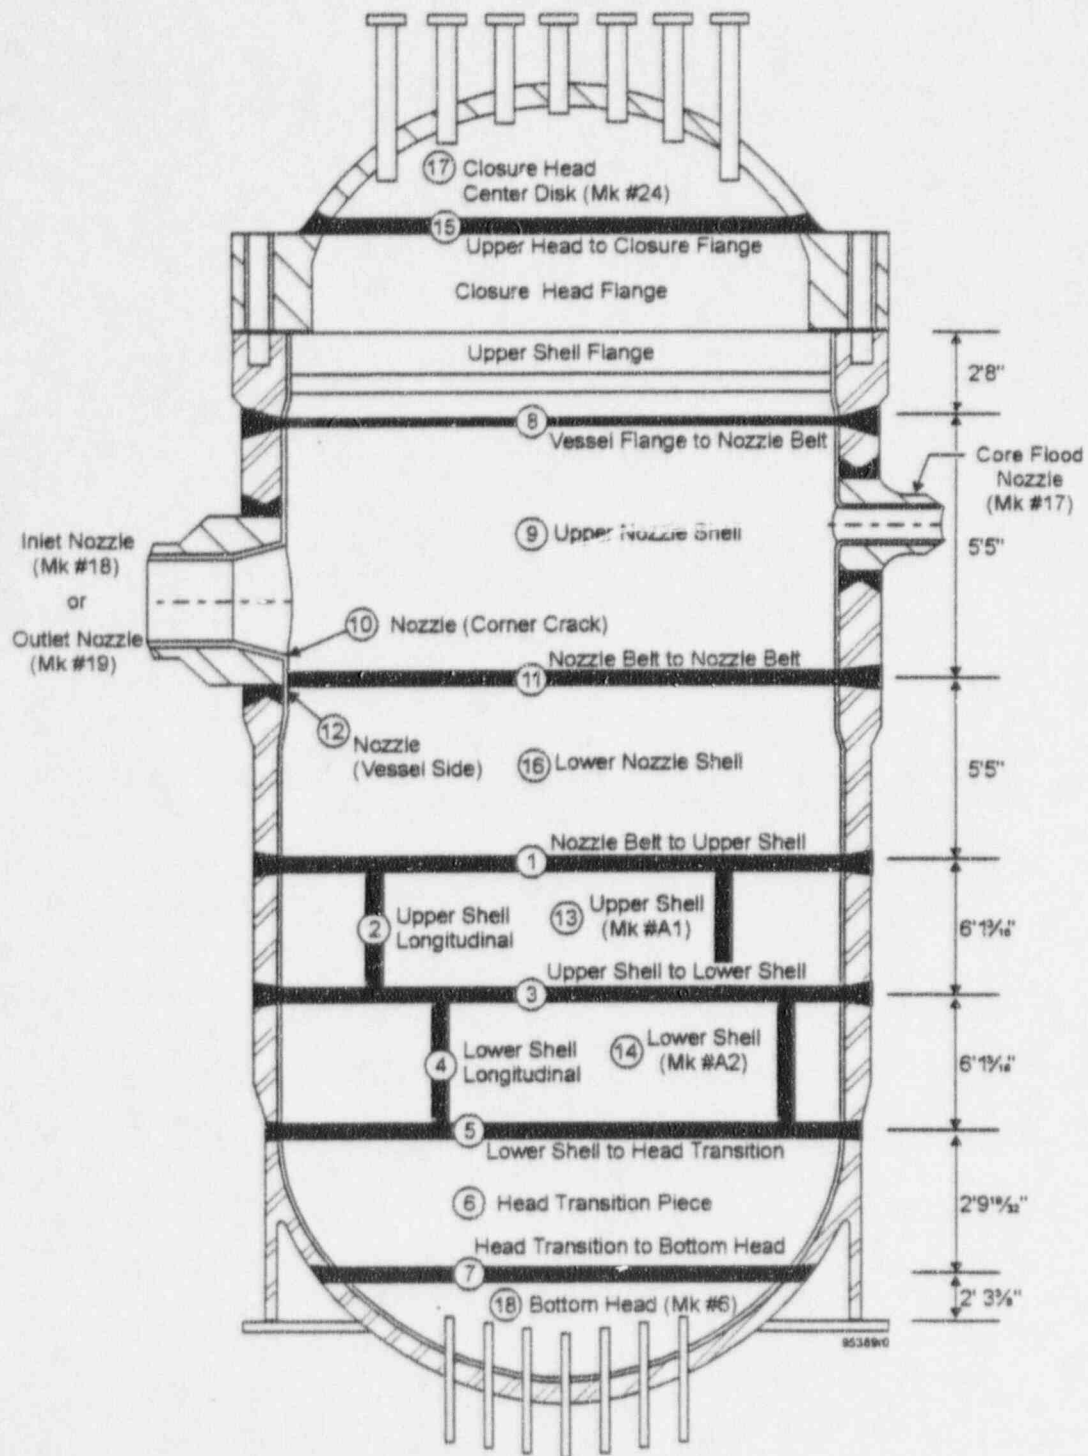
Plates and Weld Locations of CR-3 Vessel
